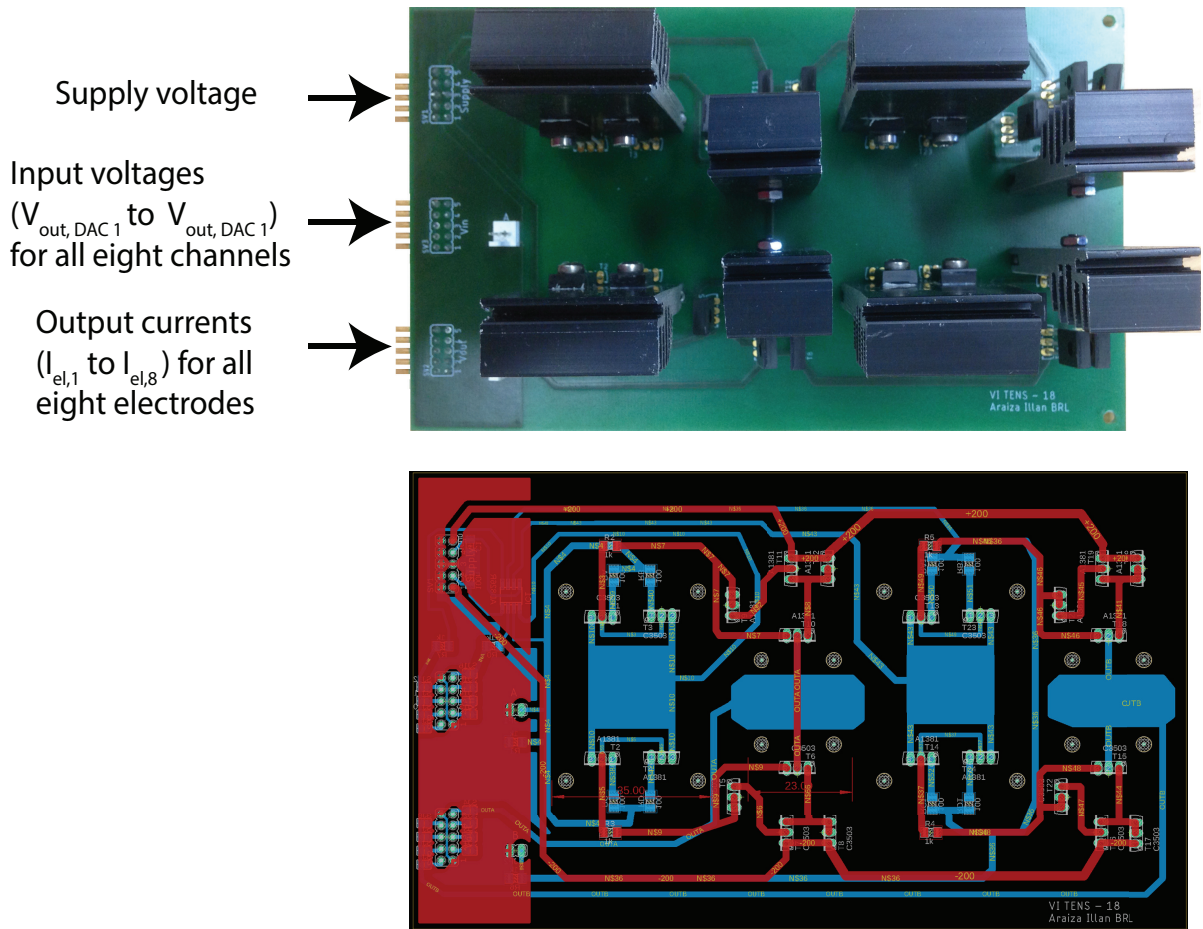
Circuit board comprising two VI units. The implemented board is shown at the top and the circuit board drawing at the bottom.
